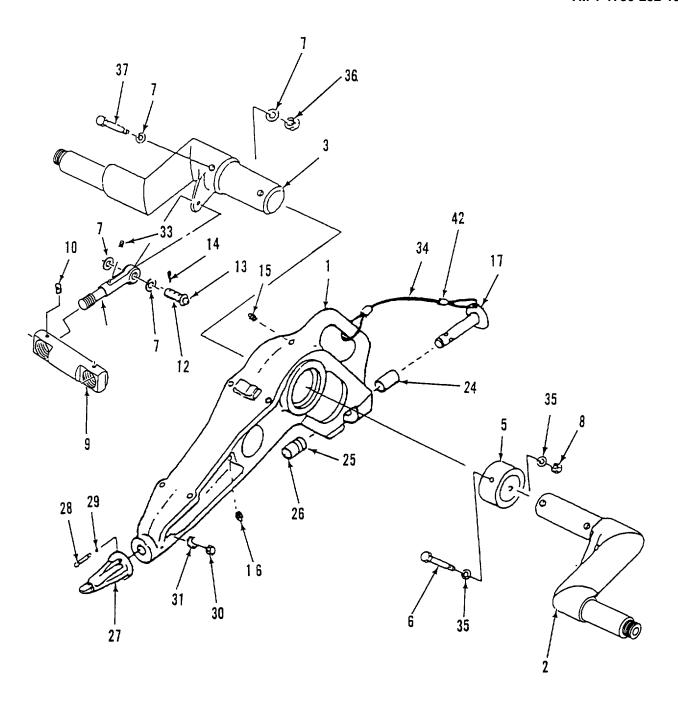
Cradle Assembly, P/N 214-050-011-101
